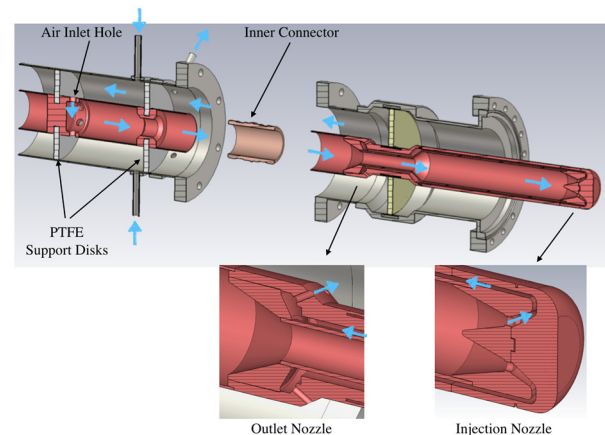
Exploded cutaway view of the force-air-cooled coaxial antenna coupler.
